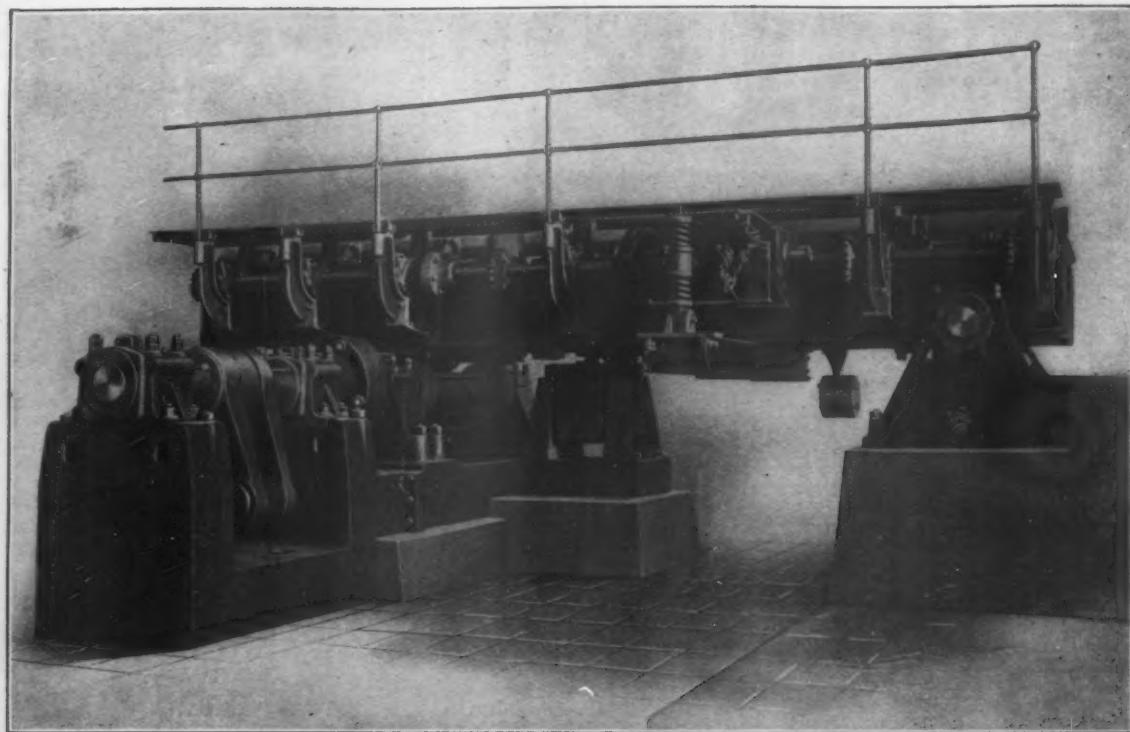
Tilting Tables for the 28-In. Rail Mill—Table Side.
